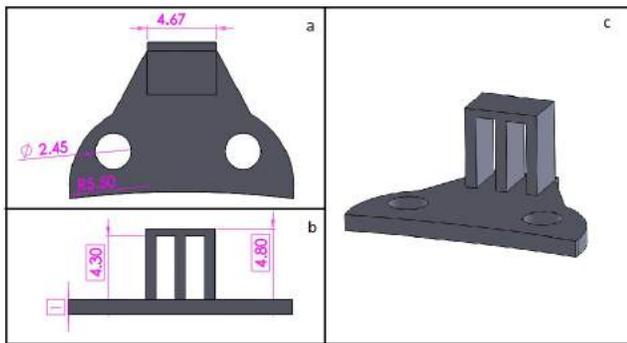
a) Top view of gripper base. b) Front view of gripper base. c) Gripper base (all dimensions are in centimeters. Figure not to scale)
